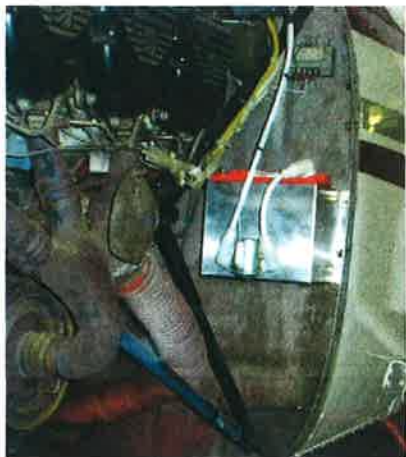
Horizontal Inst'll with Typical Engine Mount.
